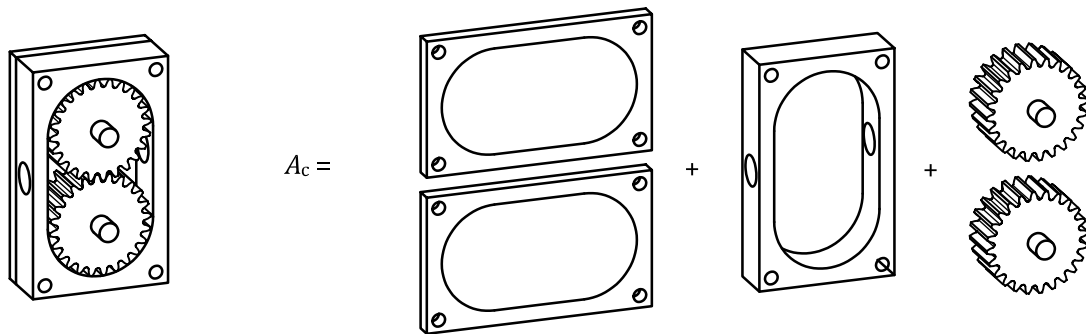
Diagrammatic representation of the wetted surfaces of a hydraulic gear pump
